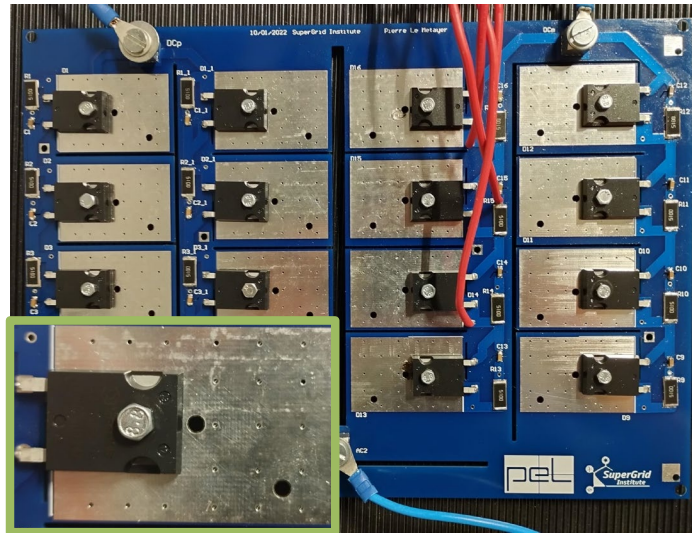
4 kV PCB-implemented diode rectifier, with zoom on patterned copper patch used as heatsinks on both sides (bigger holes are for thermocouple mounting).
